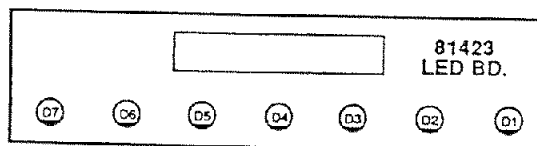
81423 BANDSWITCH LED BOARD COMPONENT LAYOUT
